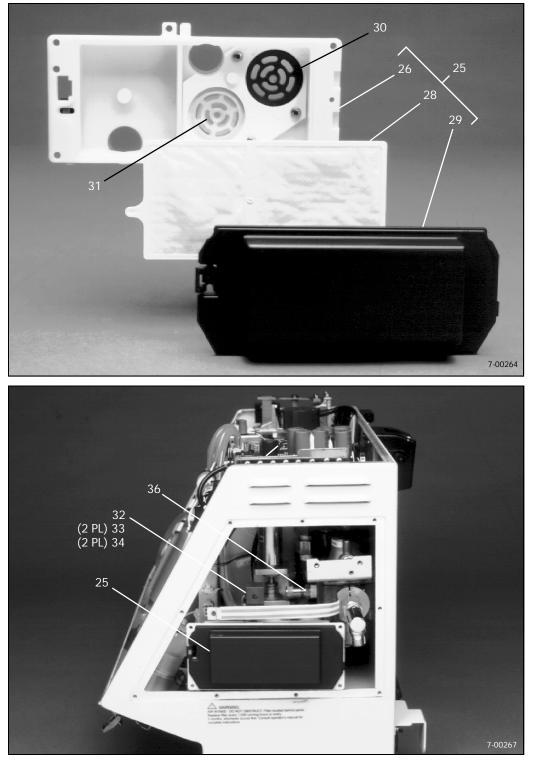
Ventilator head assembly (Sheet 2 of 2)
